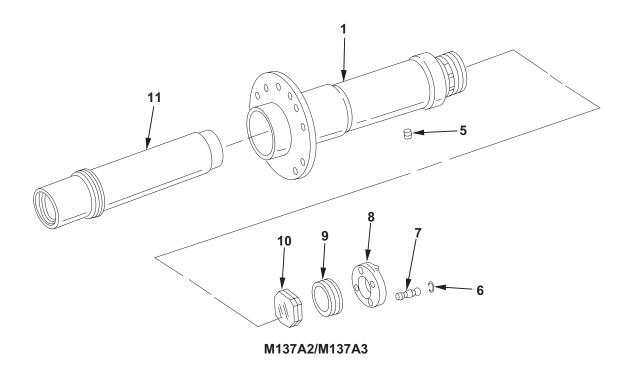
Objective and Reticle Assembly, M137, 11741200, and Objective and Reticle Assembly, M137A2/M137A3, 12961437 (Sheet 2 of 2).
